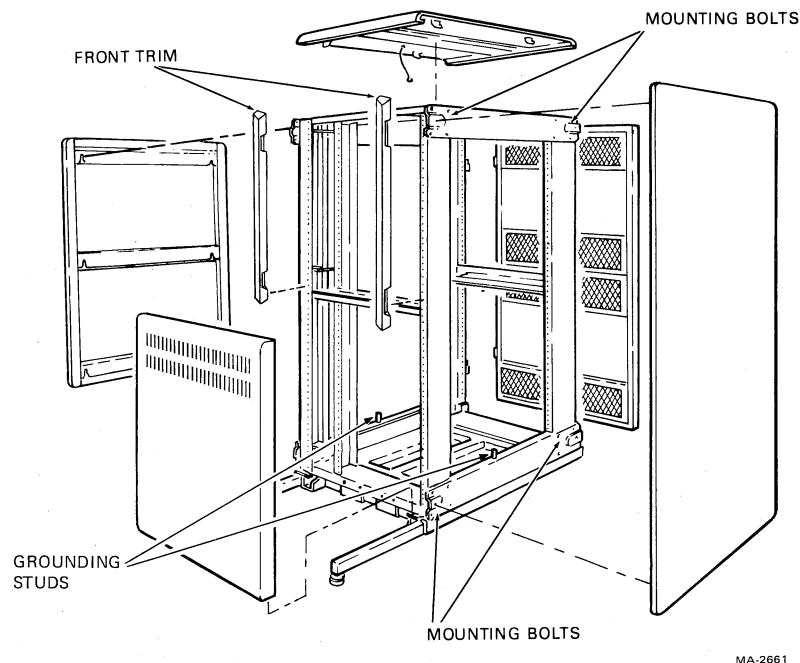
Cabinet with Side Panels and Top Cover Removed
